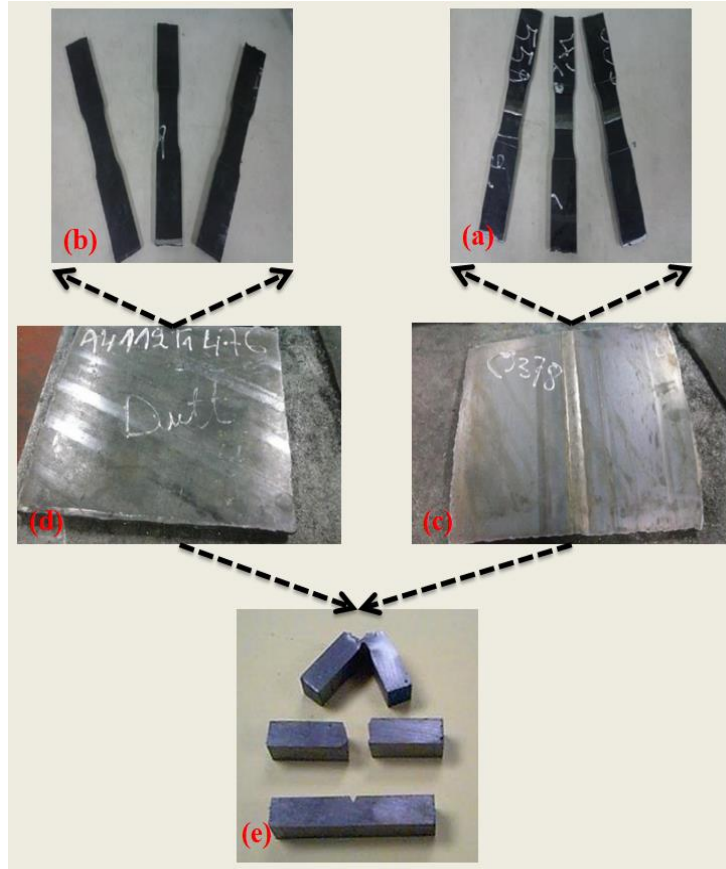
17 Sample for tensile test (a, b), Butt joint of API X 70 steel using arc welding (c), Steel plate (d), sample for impact test (e).
